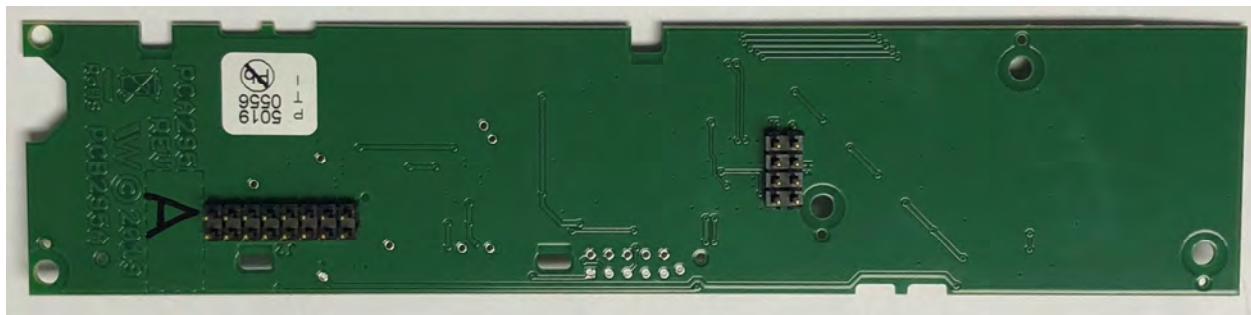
Bottom Side, PCA 295 (Front control panel (bezel)).
